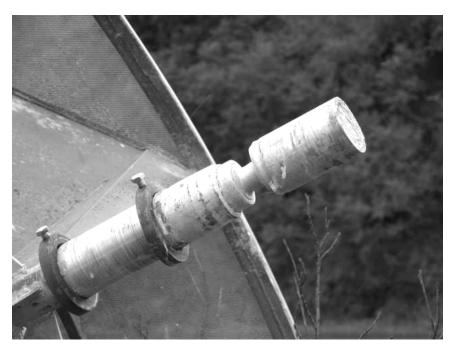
The photo illustrates the trap cone spindle and O-rings. Excessive wear on the spindle occurred due to improper placement of the bipod hoist structure. Care should be taken so that the bipod hoist structure or does not contact the rotating spindle.
